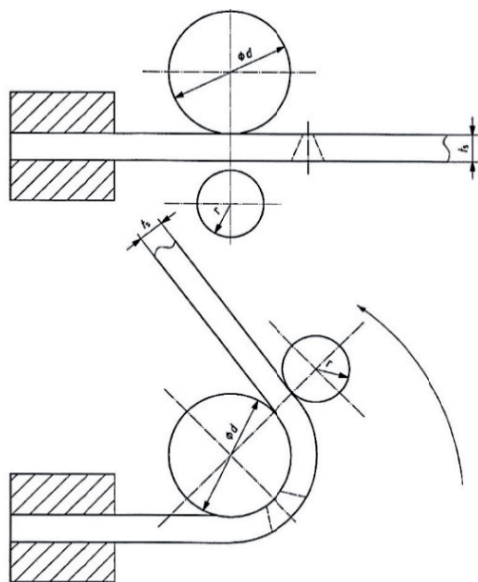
A diagram of proper bend test with the use of a bending roller [29]
